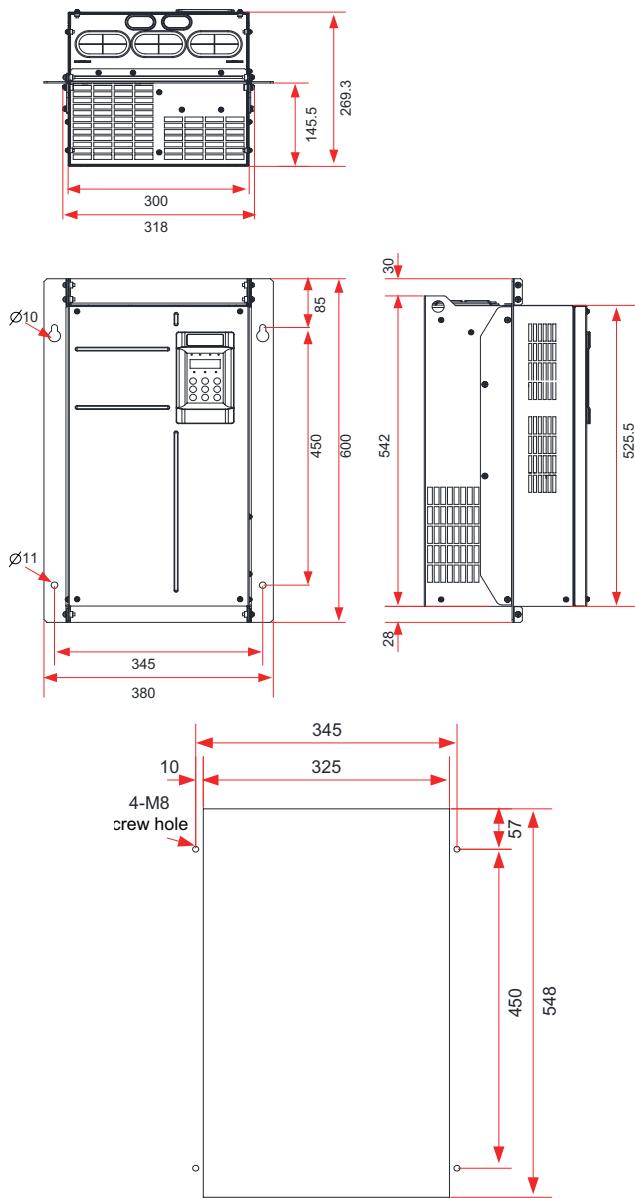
Through-hole mounting bracket and mounting hole dimensions for 45–55 kW AC drive models (mm)
